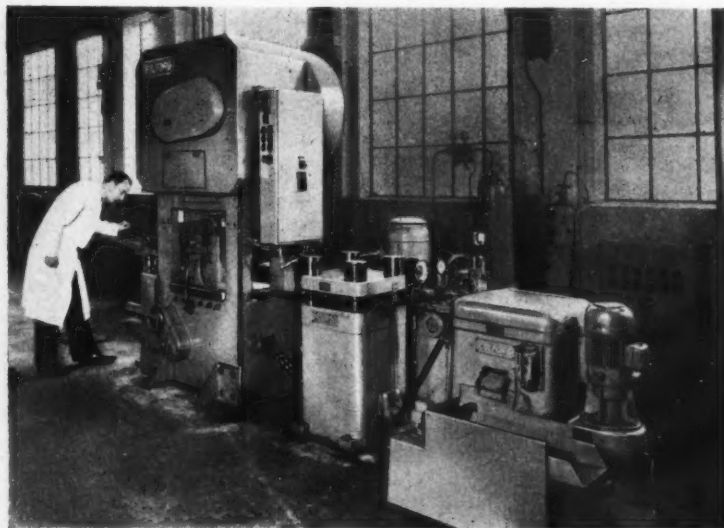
This Colforg installation for the production of slugs for cold forging comprises a cropping machine, a pre-forming machine, and a chamfering machine
